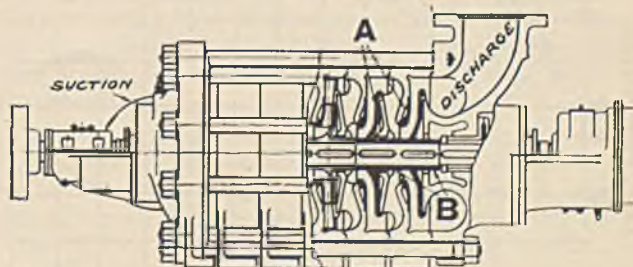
Arrangement of Turbine Pump, impellers of two stages removed.
